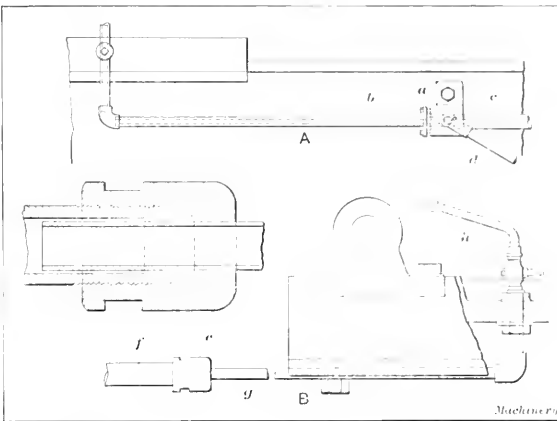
A. Sliding Pipe and Stuffing-box of Turret Lathe. B. Telescopic Pipe Connection for Carriage of Gear-cutting Machine
